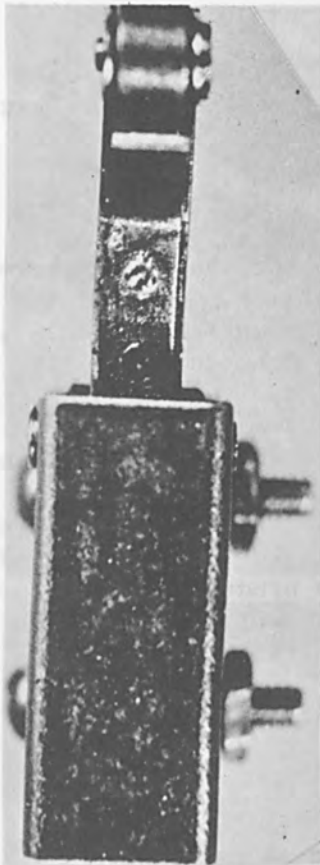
EB welder utilized to attach angle bracket to actuating arm of microswitch.
